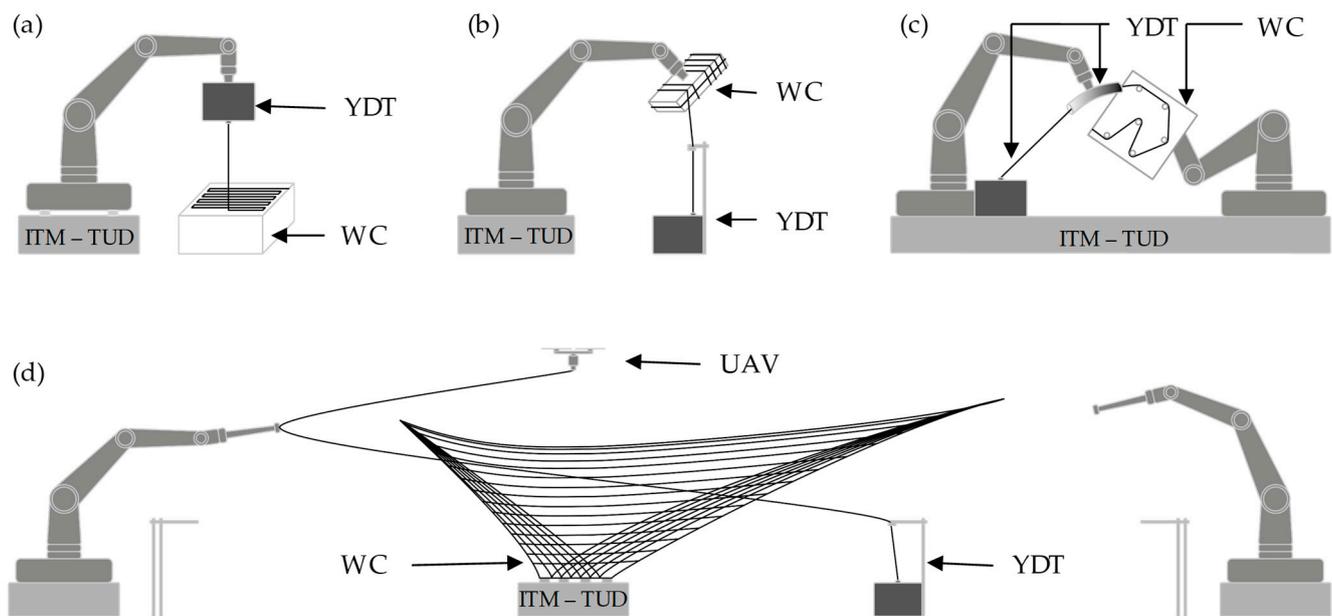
Robot-assisted yarn deposition principles: (a)—process principle A; (b)—process principle B; (c)—process principle C; (d)—process principle D; WC = workpiece carrier, YDT = yarn deposition tool, UAV = unmanned aerial vehicle [80,81,83,87,89,92,93].
